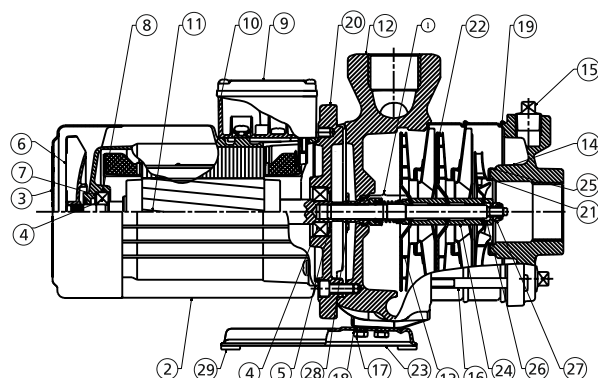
SH, SHI & SHN 8 with SMG 80 motor
